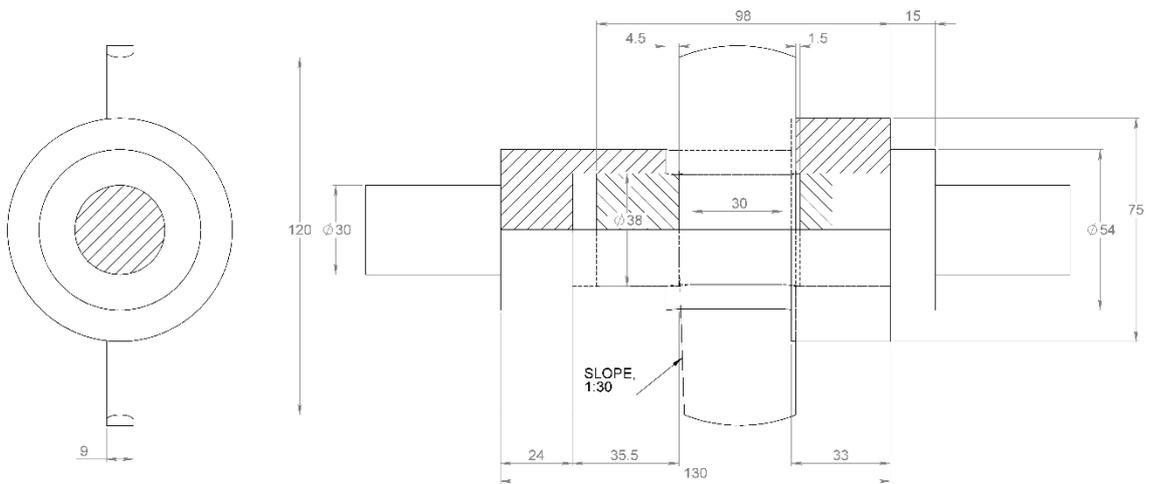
Assembly drawing of cotter joint with socket and spigot
